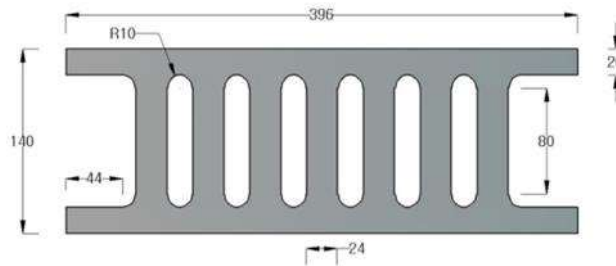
Geometrical dimensions of the sample of the shape-controlled metallic damper under investigation [18].
